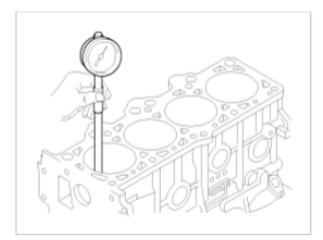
Measuring Cylinder Bore Diameter Using Cylinder Bore Gauge Courtesy of HYUNDAI MOTOR AMERICA
